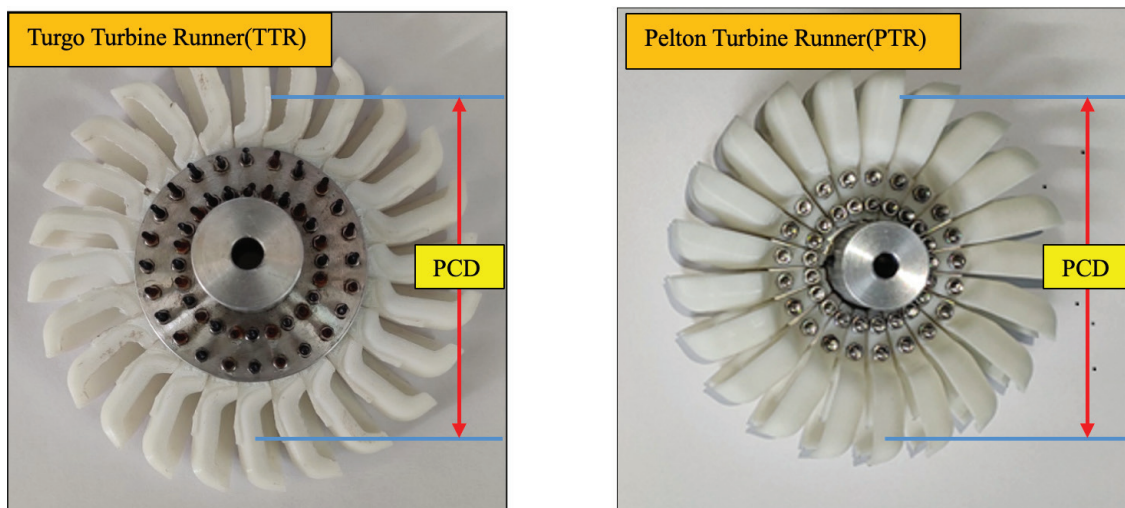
Designed and manufactured Turgo and Pelton turbine runners with 3D-printed buckets.
